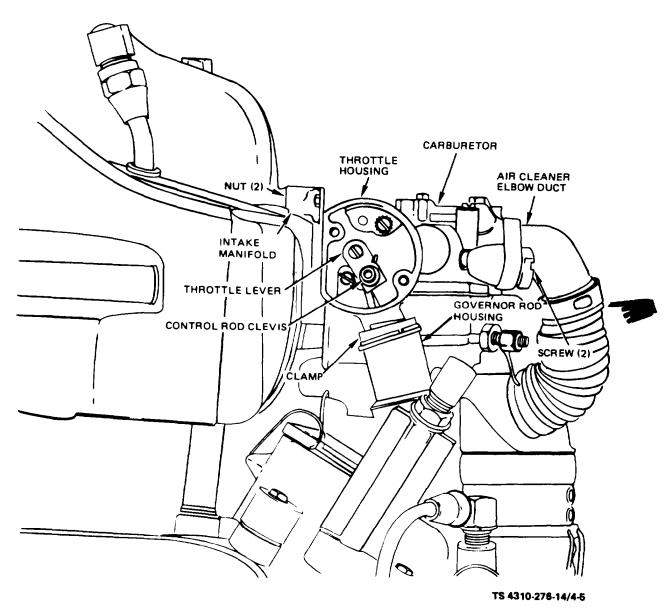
Carburetor throttle controls, removal and installation (Model 1A08-1).
